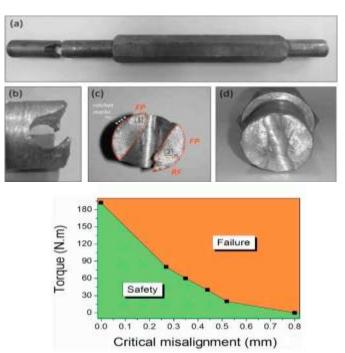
& 31 Different views of Fracture surfaces and Failure diagram Assuming shaft life 1.26x10⁴ cycles[27]
